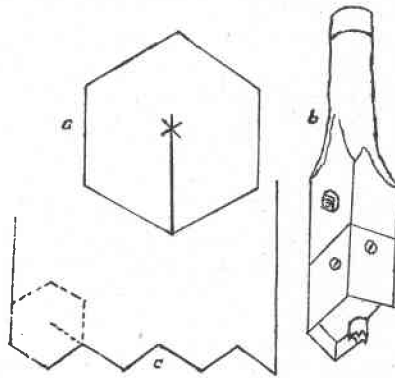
Fig. A. *a* Tarred felt card in outline, one-third size; *b* tool for cutting cards, about one-sixth size; *c* showing how discs are cut, dotted lines show position of tool. (After Goff.)
